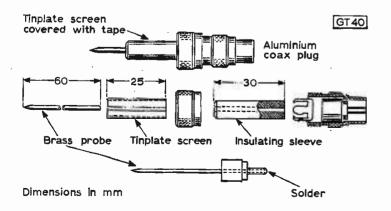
One probe can be made from a coaxial cable plug as shown here.
